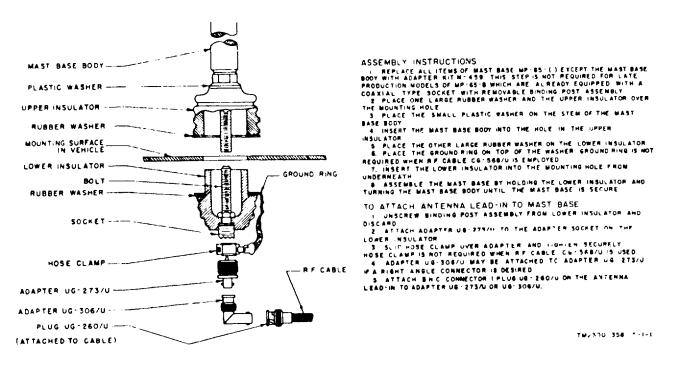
Assembly instructions for Mast Base MP-65() (for antenna cable connectors using BNC connectors).
